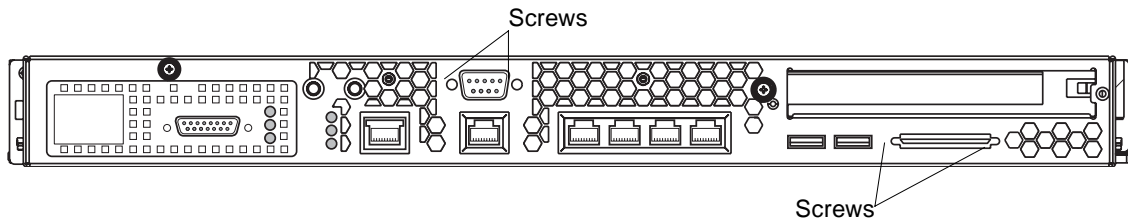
Removing the SCSI and Serial Port Screws
